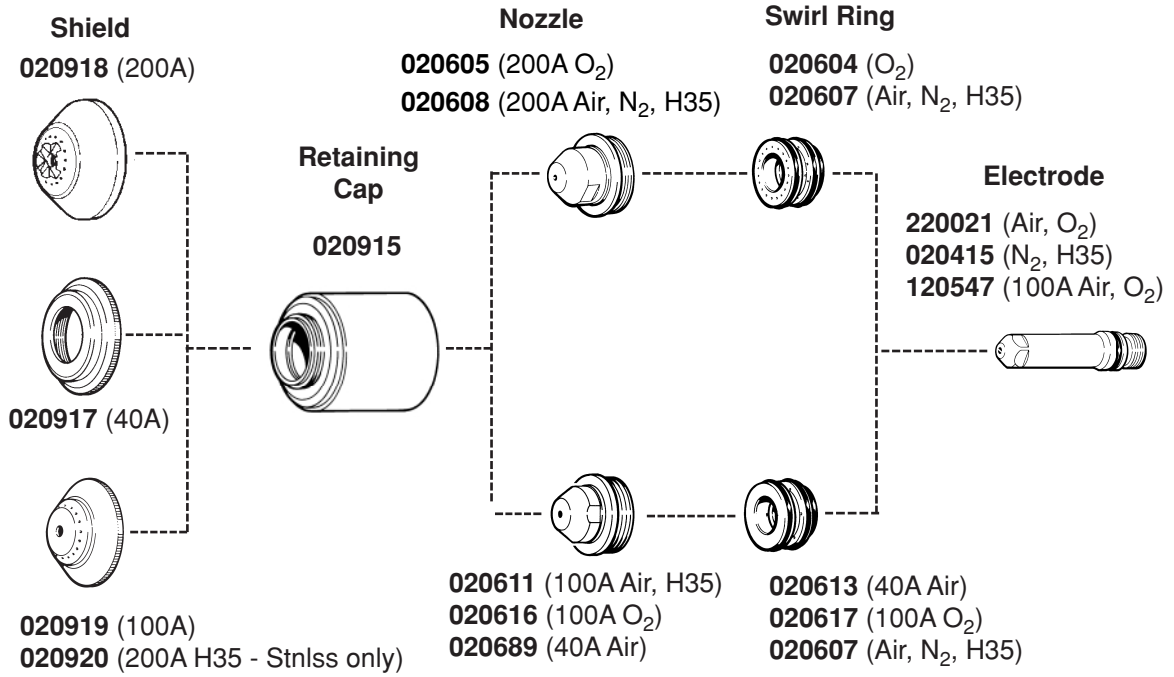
PAC200T (90°) Cutting Trigger Torch Consumable Parts
